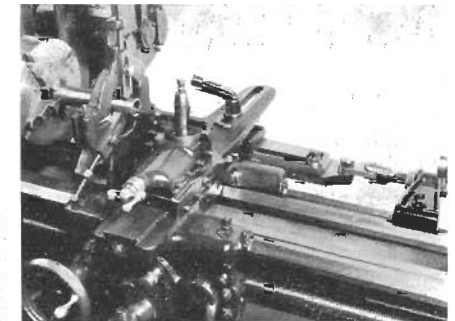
Boring a Tapered Hole with the Taper Attachment
